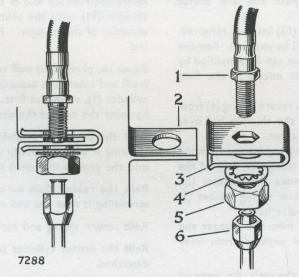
Flexible hose connection - In some instances the locating plate (3) is omitted.
